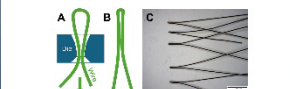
Sharp bend forming test performed by drawing a looped wire through a die 2x the wire diameter (A) to create a dead sharp bend (B), which Paliney 35 HT survived (C).
